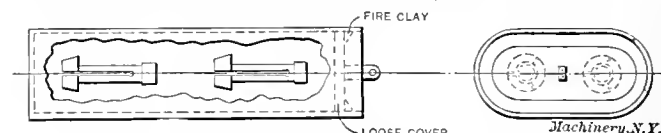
Method of Packing Machine Steel Collets for Case-hardening.
